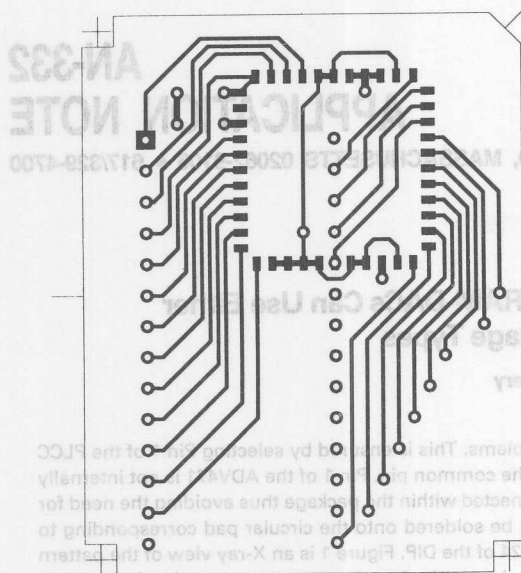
PCB Component Side Layout Pattern Using Surface Mounted PLCC
